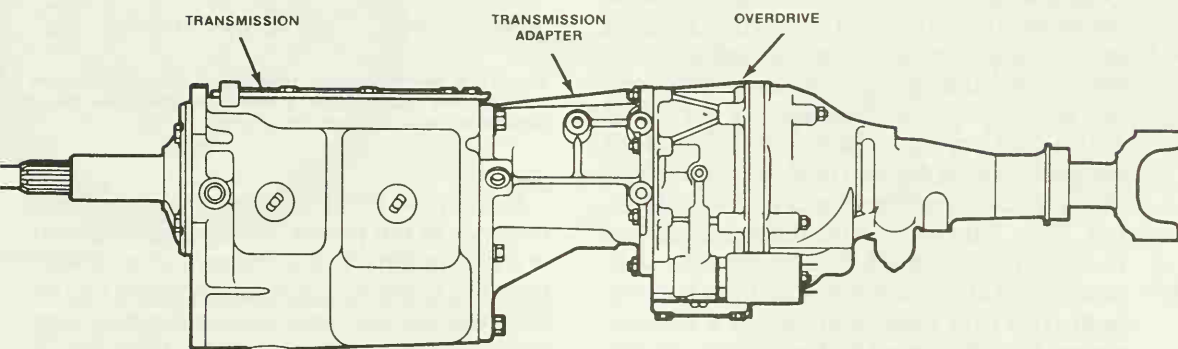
A planetary overdrive unit is mounted on the rear of the transmission in a separate housing. (American Motors Corporation)
